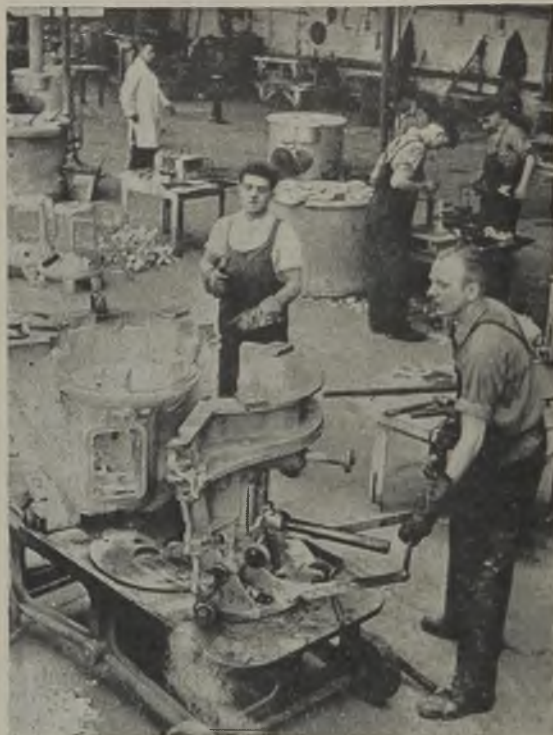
DIE FOR "LEYLAND" GEARBOX SHOWN IN FIG. 4 IN OPERATION.
